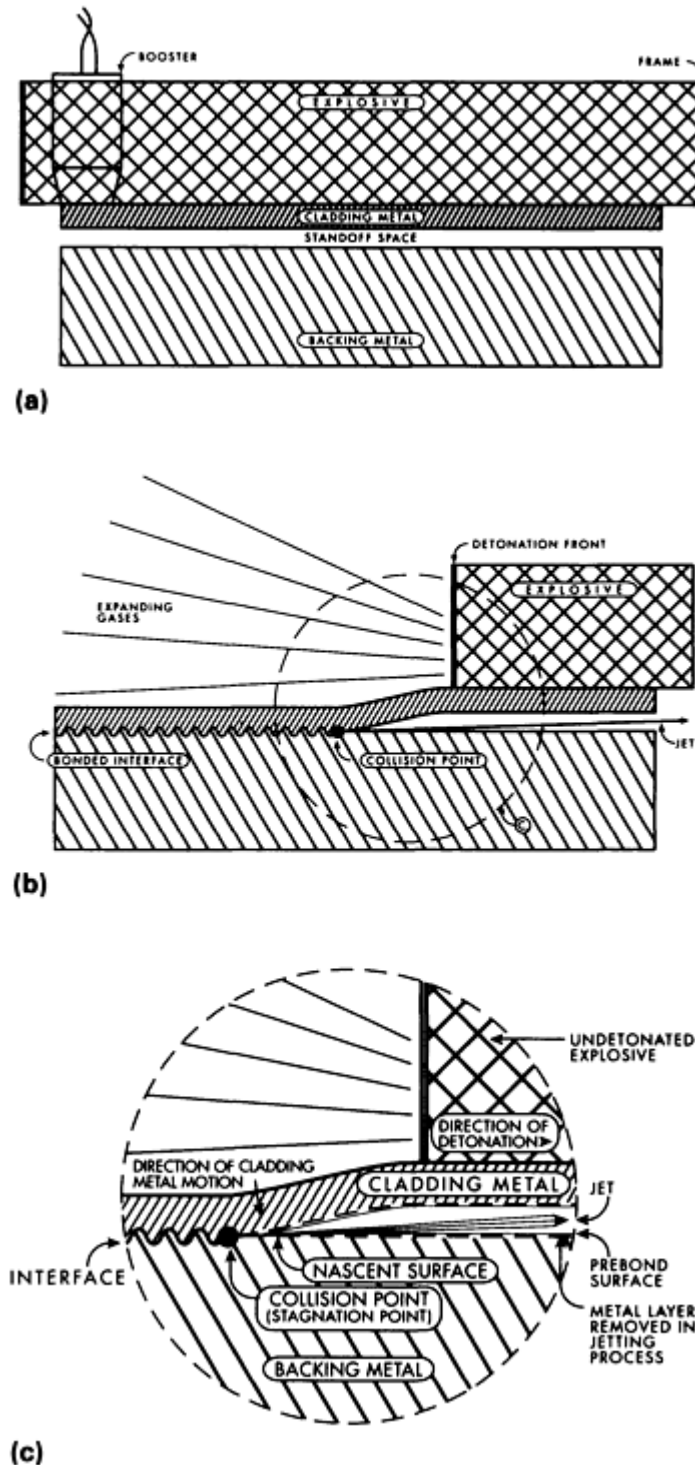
PARALLEL-PLATE EXPLOSION WELDING PROCESS. (A) EXPLOSION-CLADDING ASSEMBLY BEFORE DETONATION. (B) EXPLOSION-CLADDING ASSEMBLY DURING DETONATION. (C) CLOSE-UP OF (B) SHOWING MECHANISM FOR JETTING AWAY THE SURFACE LAYER FROM THE PARENT LAYER
